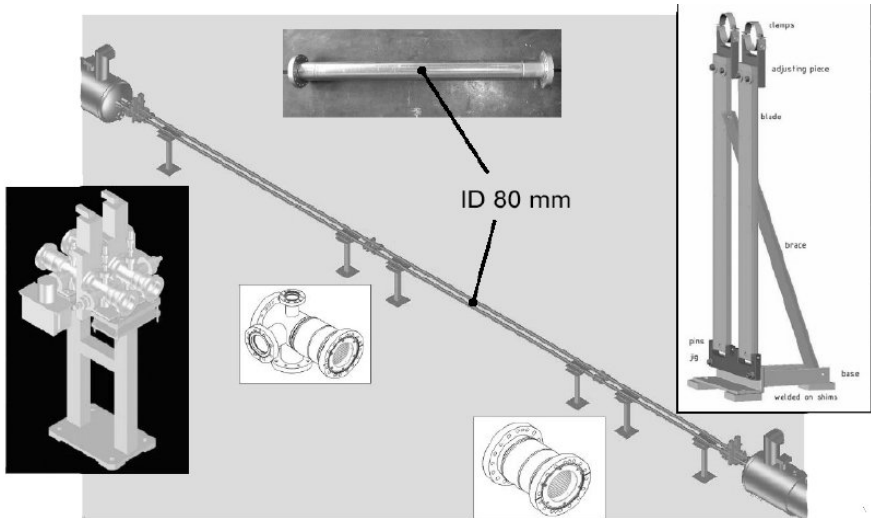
Standard layout of the RT beam vacuum system between two cryostats.
